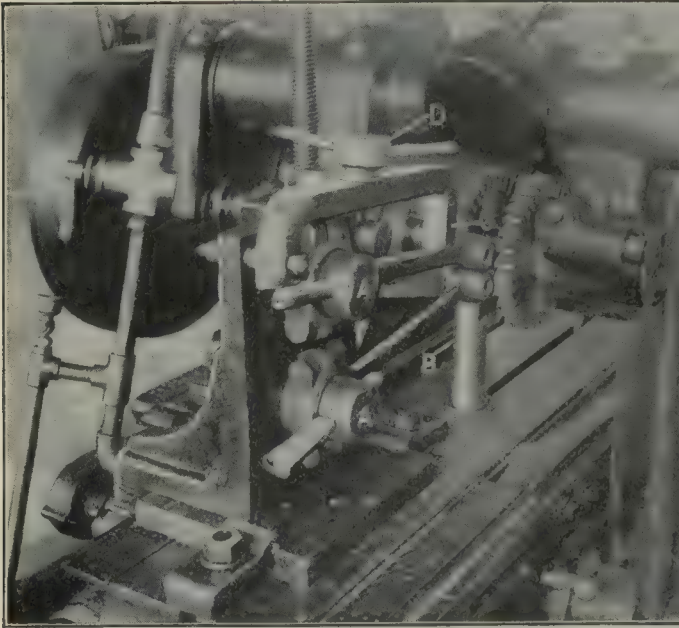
MILLING SMALL END OF CONNECTING-ROD
